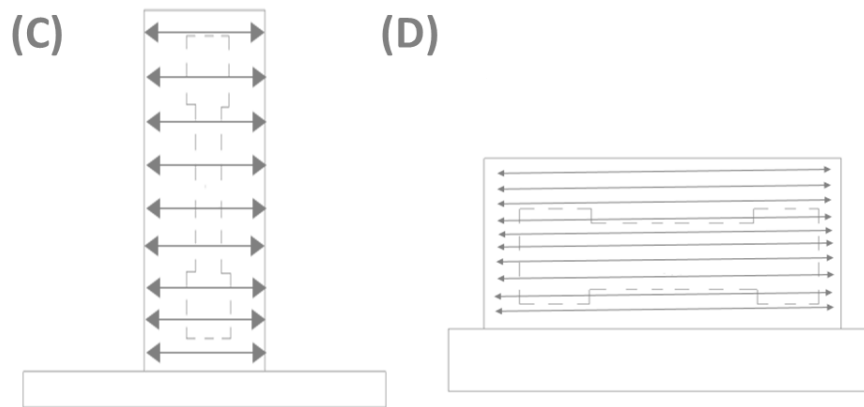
(C) Structure C: loading perpendicular to the cladding direction, and (D) Structure D: loading parallel to the cladding direction. These builds used for tensile test.
